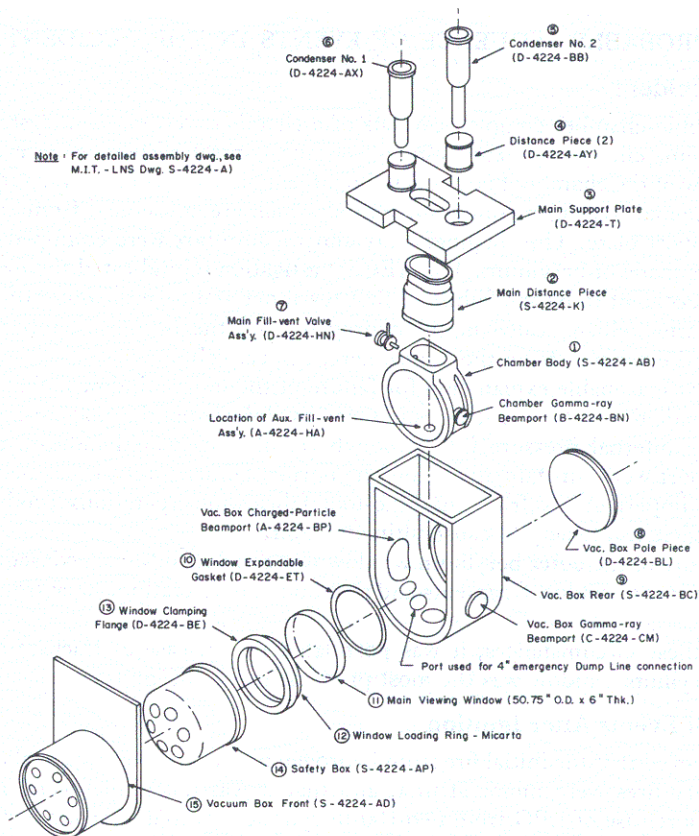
General expanded view of 40-in. bubble chamber, showing order of assembly of major components exclusive of expansion system.
